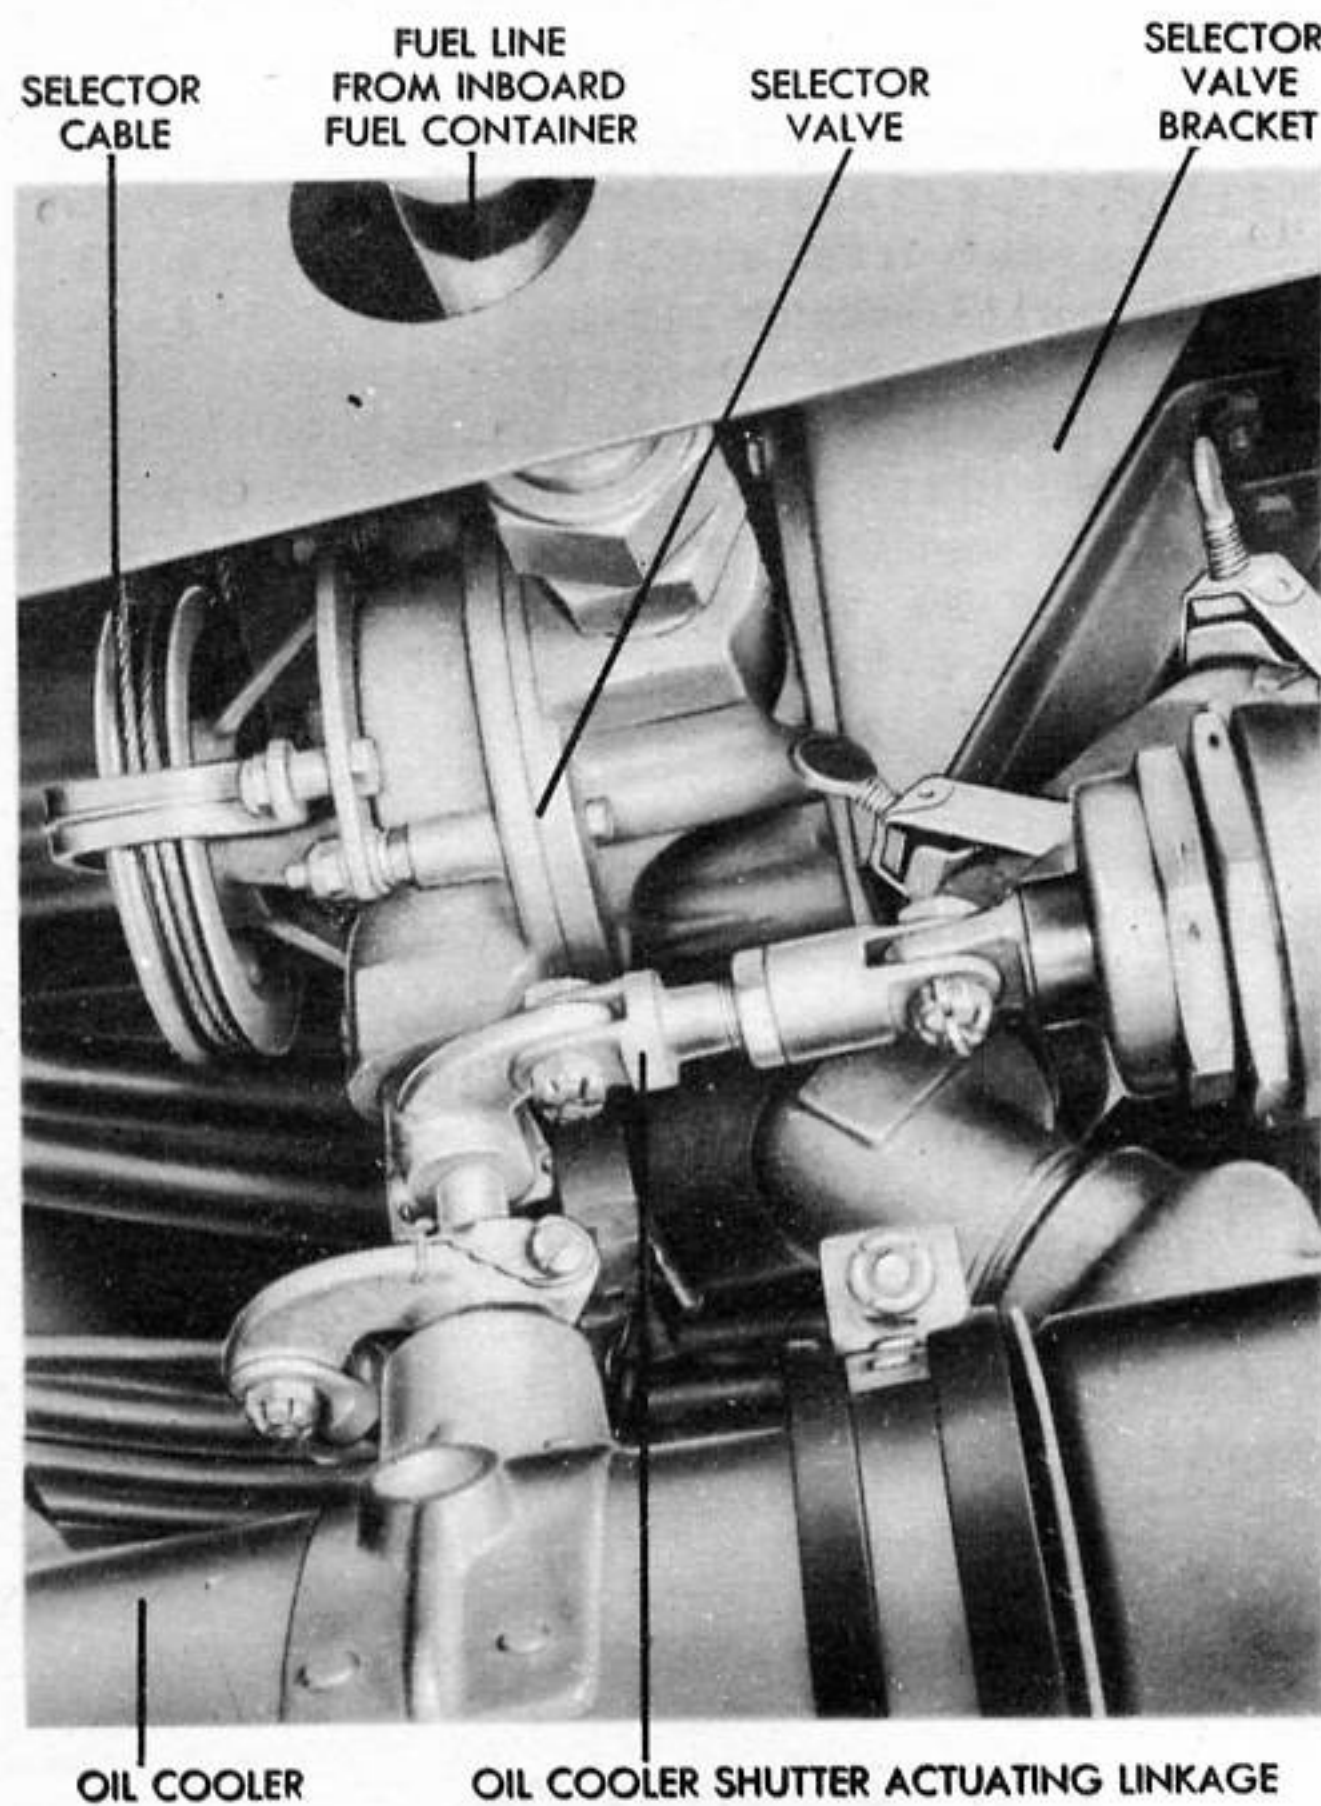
INSTALLED FUEL TANK SELECTOR VALVE
